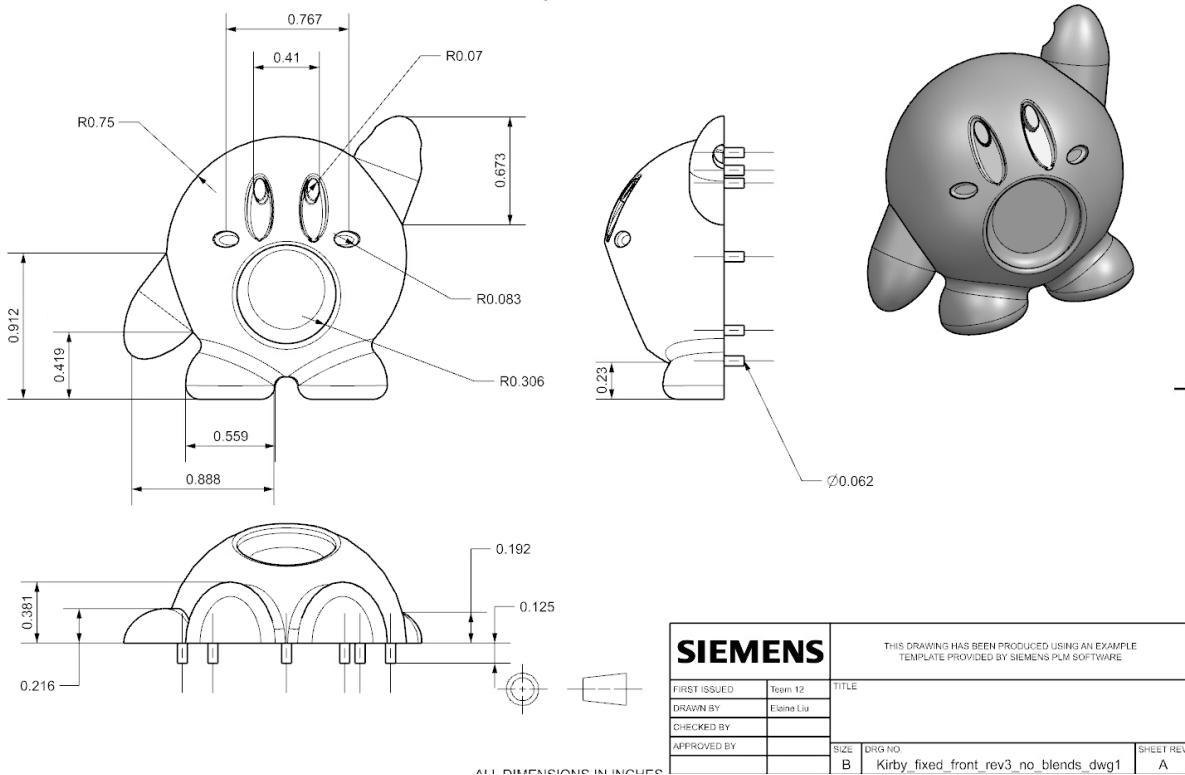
Dimensioned CAD Drawing of Kirby's Front with Dowel Inserts (Sheet 1/2)
